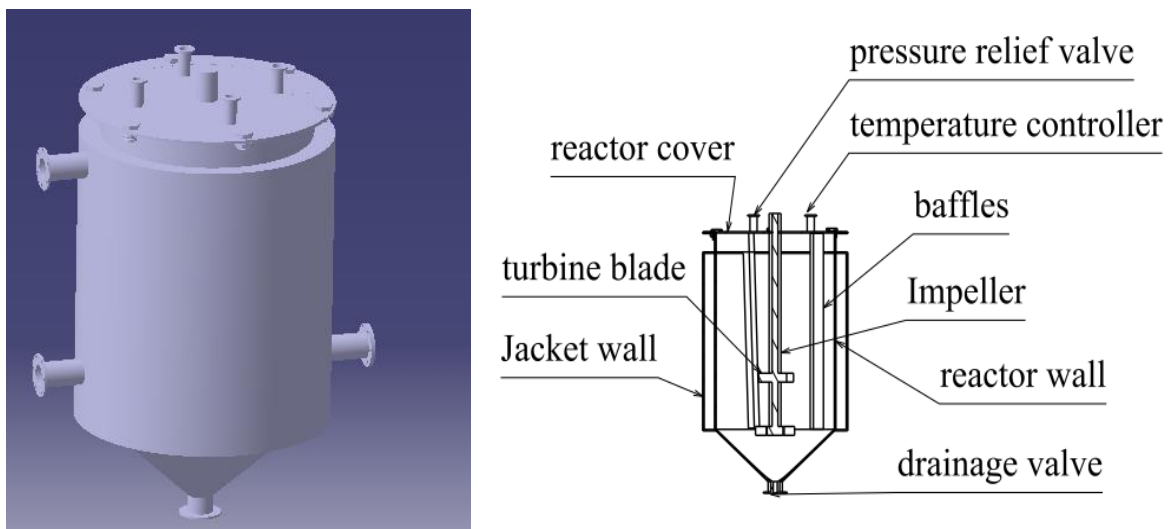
Assembled jacketed vessel with two inlets and one outlet
